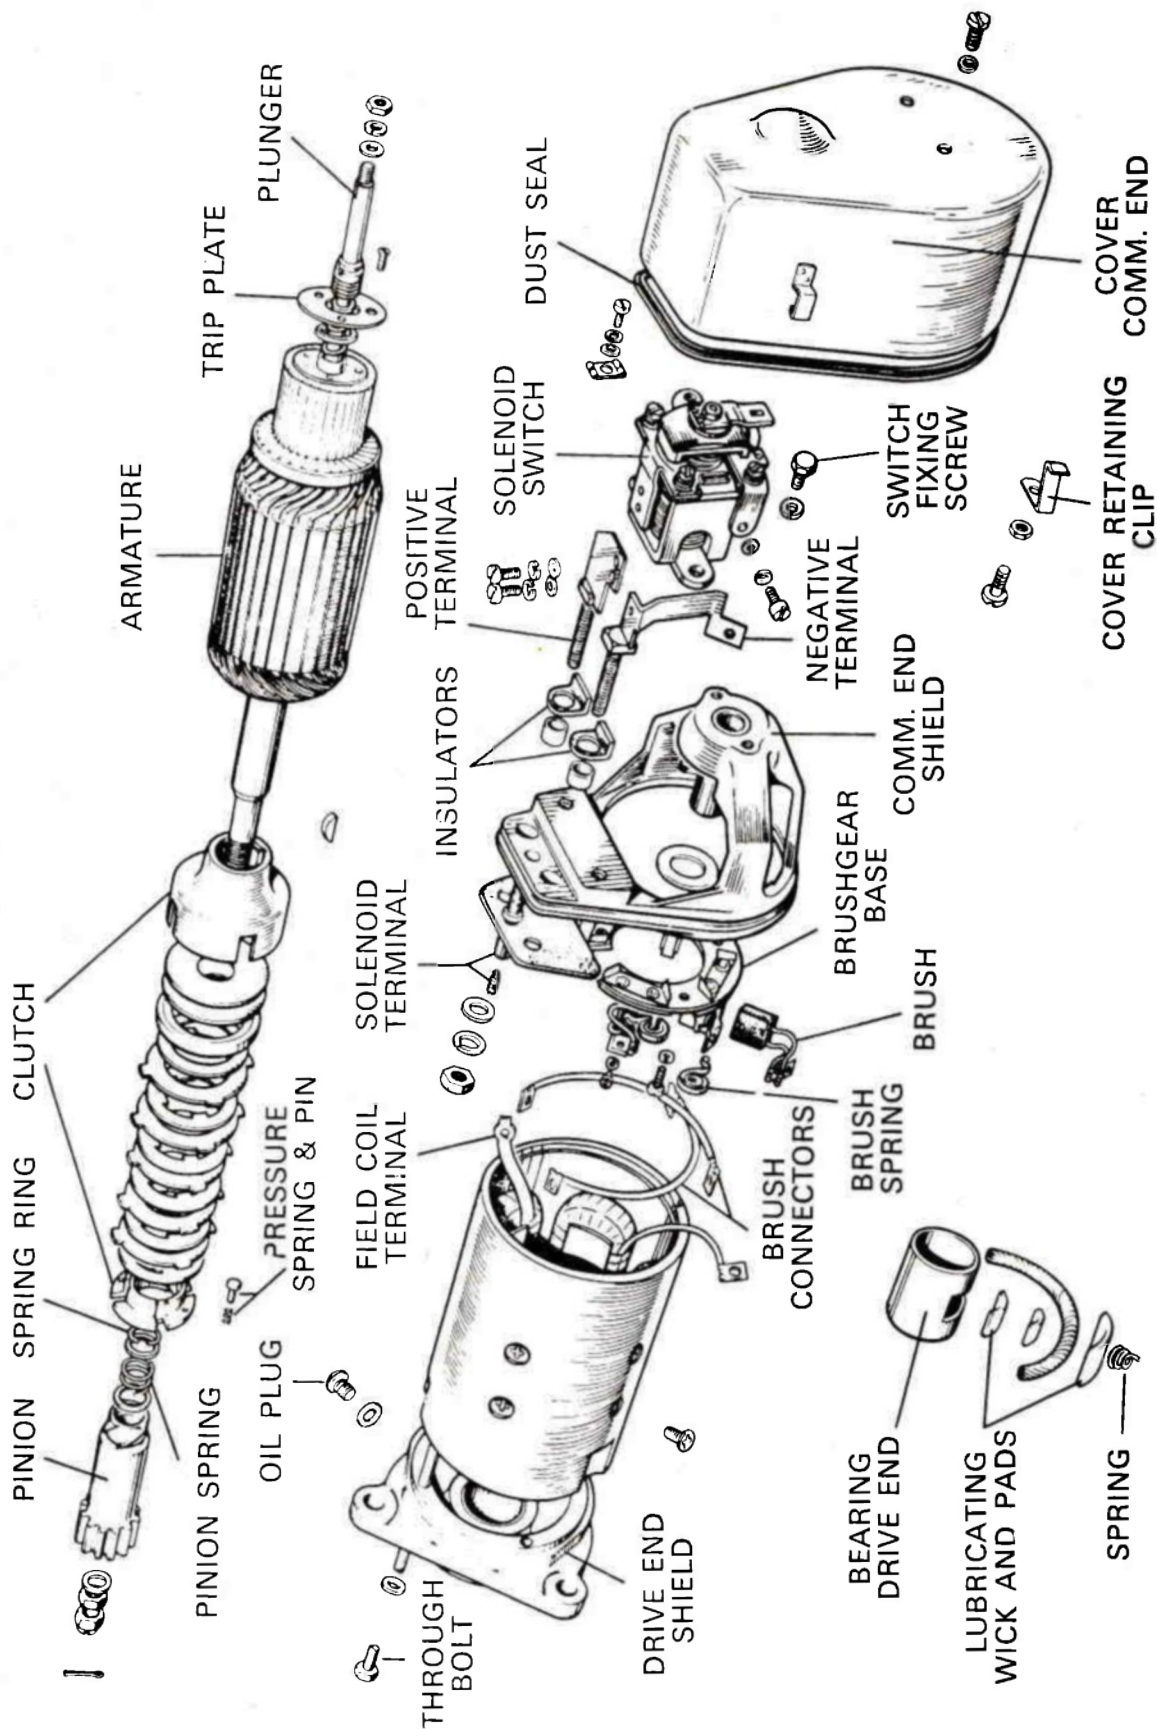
Exploded view of SL5 starter with 'pressed' brush gear
